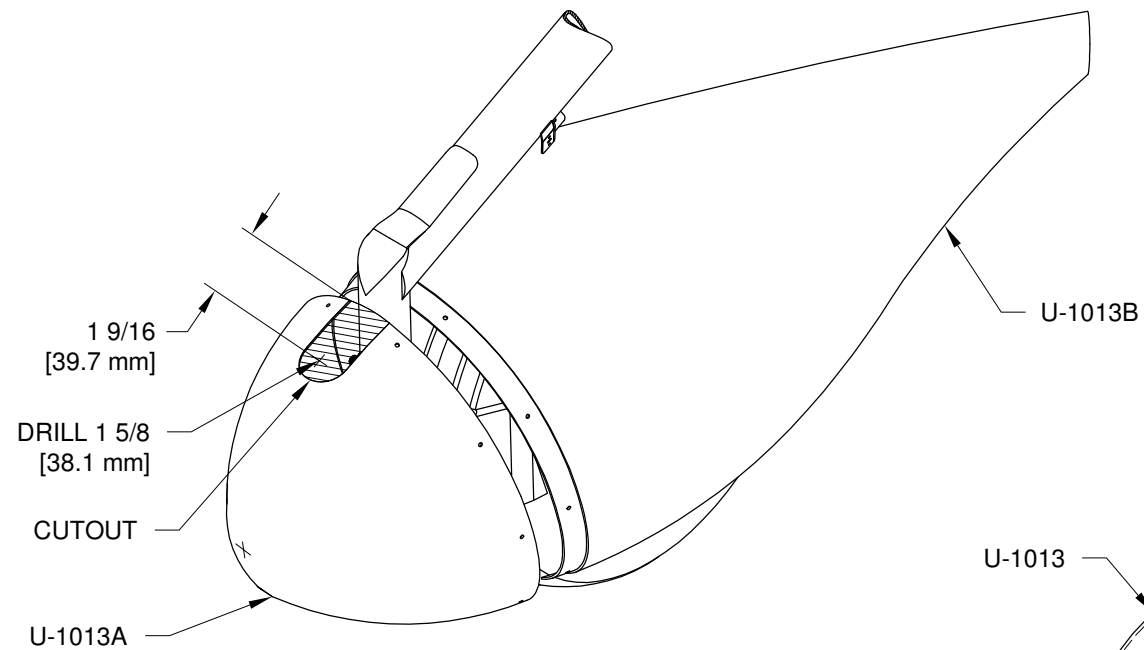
CUTTING THE SLOT IN THE WHEEL FAIRING FRONT
